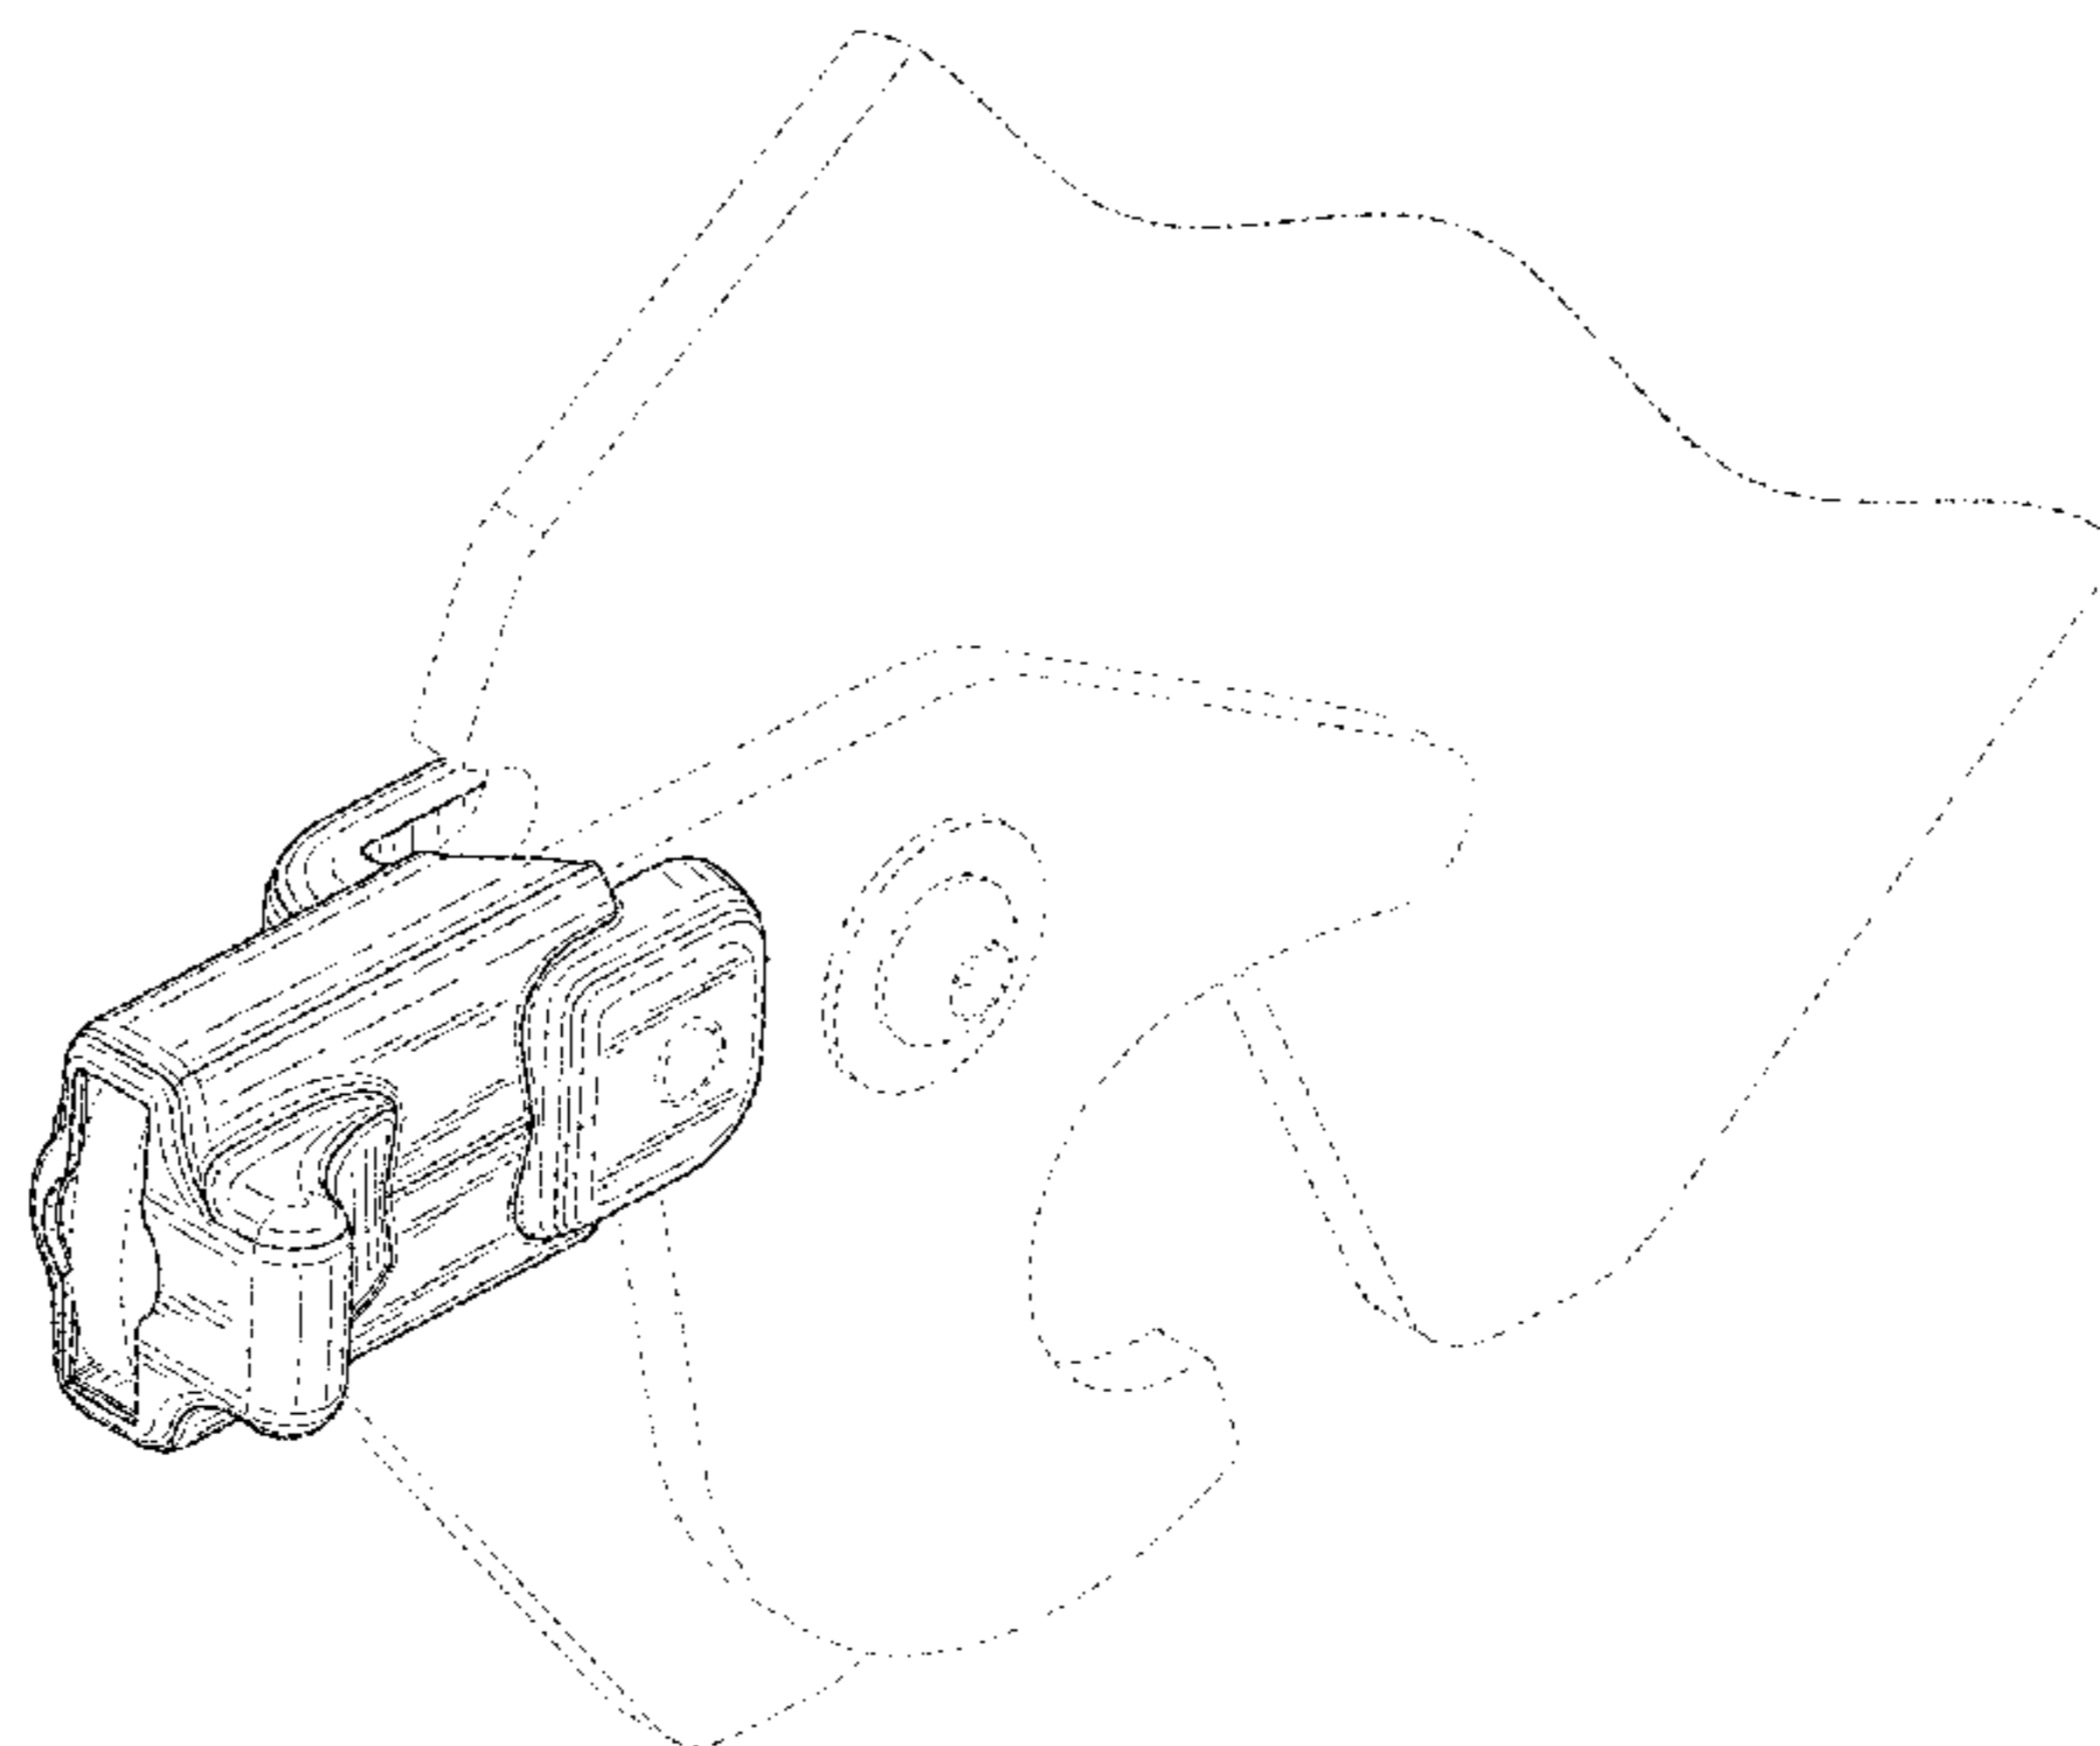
is a front perspective view of a latch handle showing our new design.
